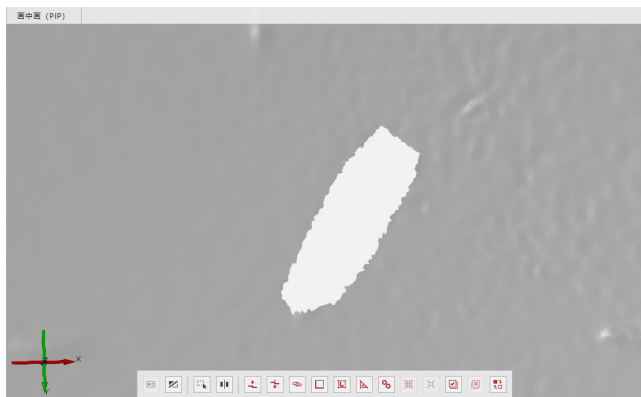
Scan data of sheet metal parts with defective sprayed developer1.
